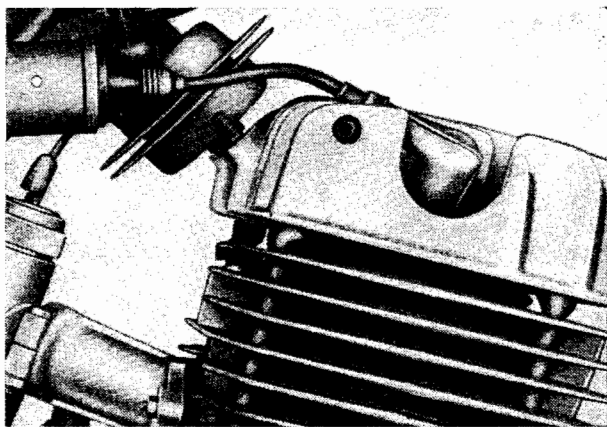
Position of the rubber elements of the upper engine mounting when replacing them
